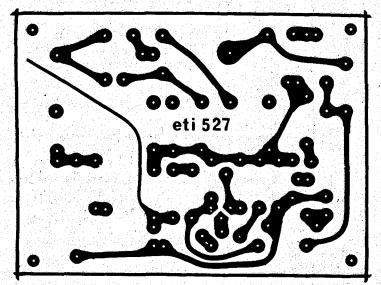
Printed circuit board layout for the dimmer. Full size.
